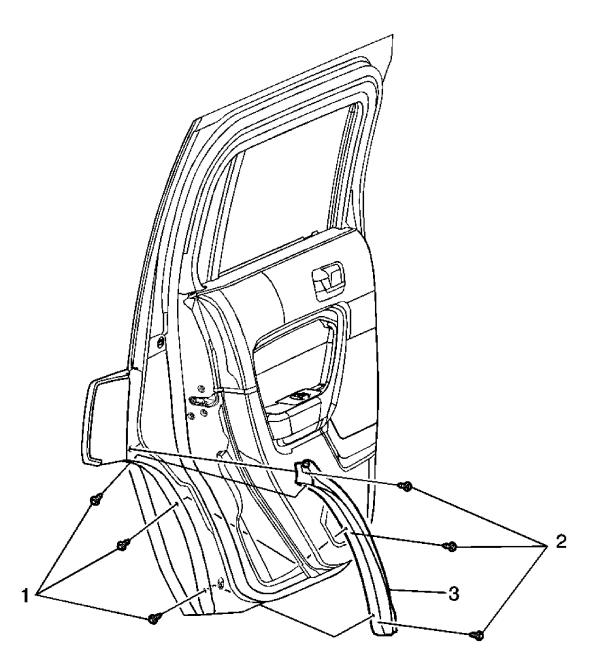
Rear Side Door Rear Auxiliary Weatherstrip Replacement Courtesy of GENERAL MOTORS CORP.
